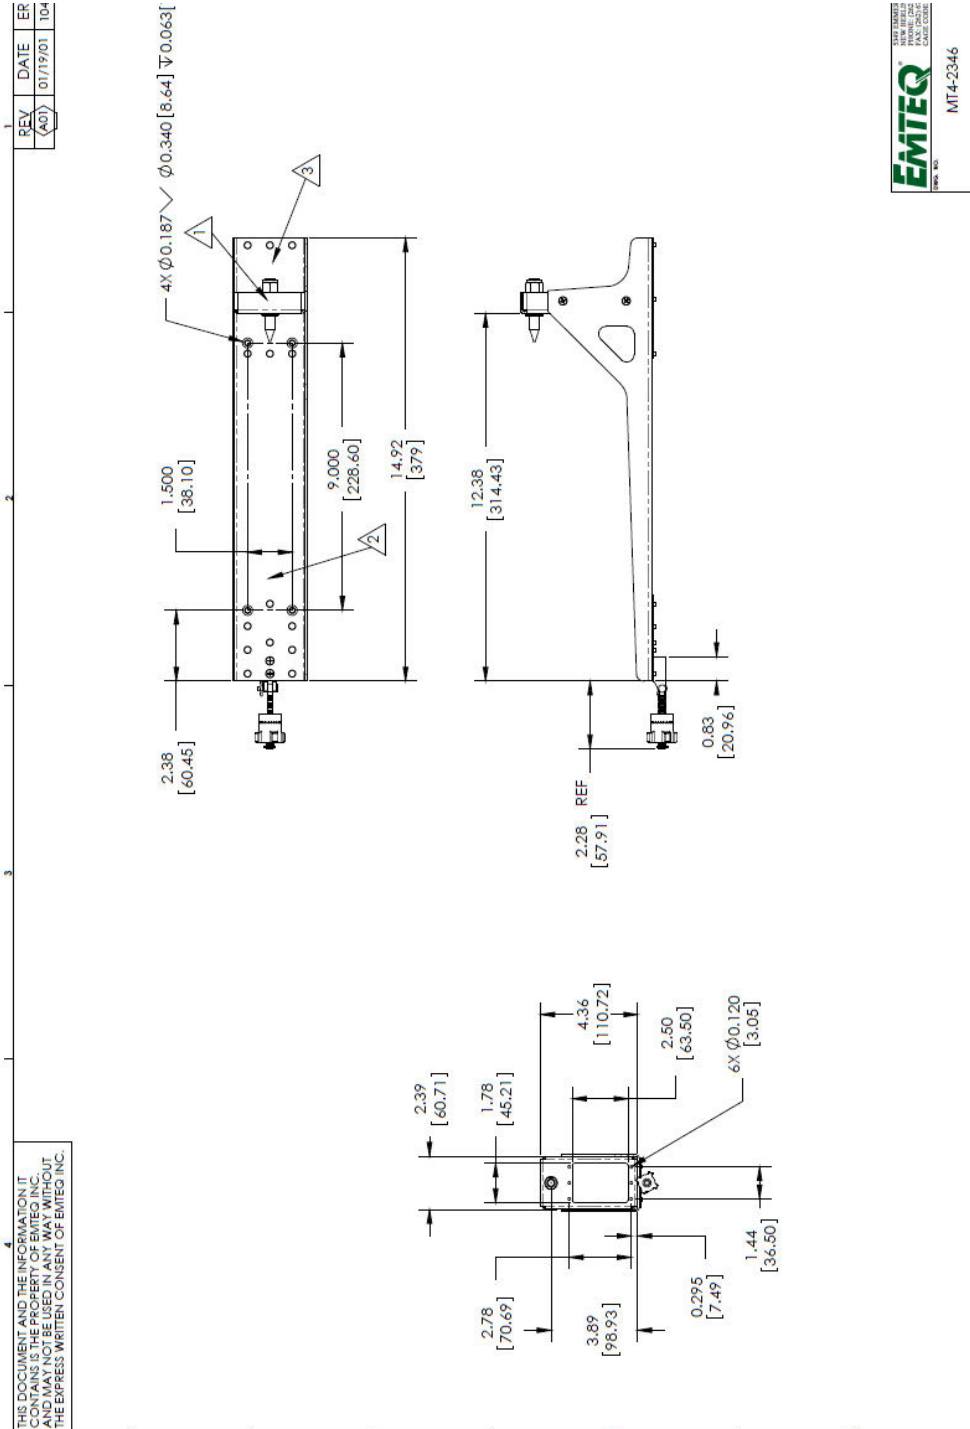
Outline drawing: SBU tray: EMTEQ MT4-2346-101 (page 2)
